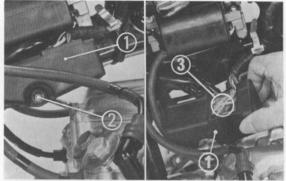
① Connector cover ③ Connector ② 6 mm screw
